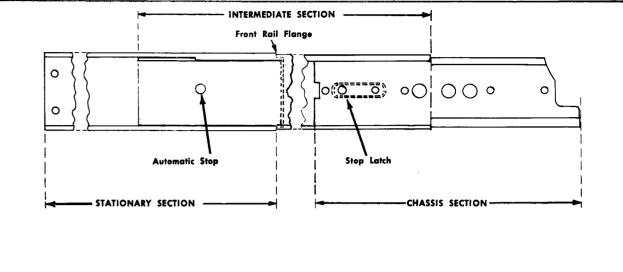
Illustration showing the slideout track assembly for the right side.
